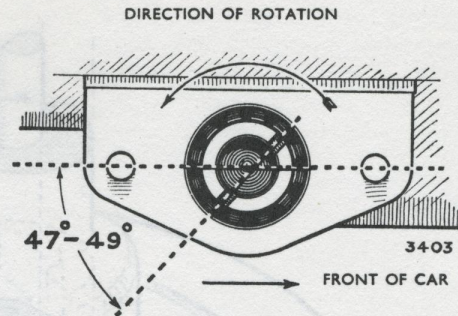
Oil pump drive correctly assembled—No. 1 cylinder T.D.C. firing.
